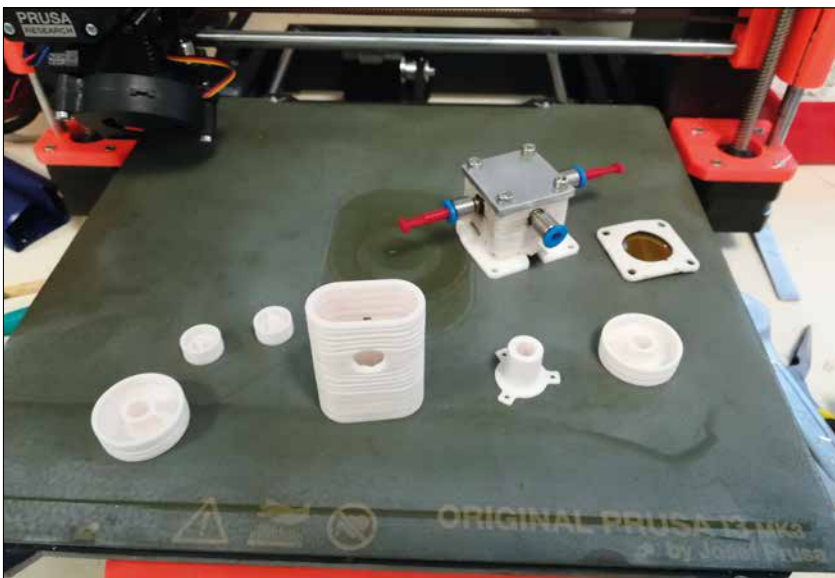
Different parts printed in Zetamix: three different sizes of heating cartridges, two sample holders, and a prototype of micro-furnace
